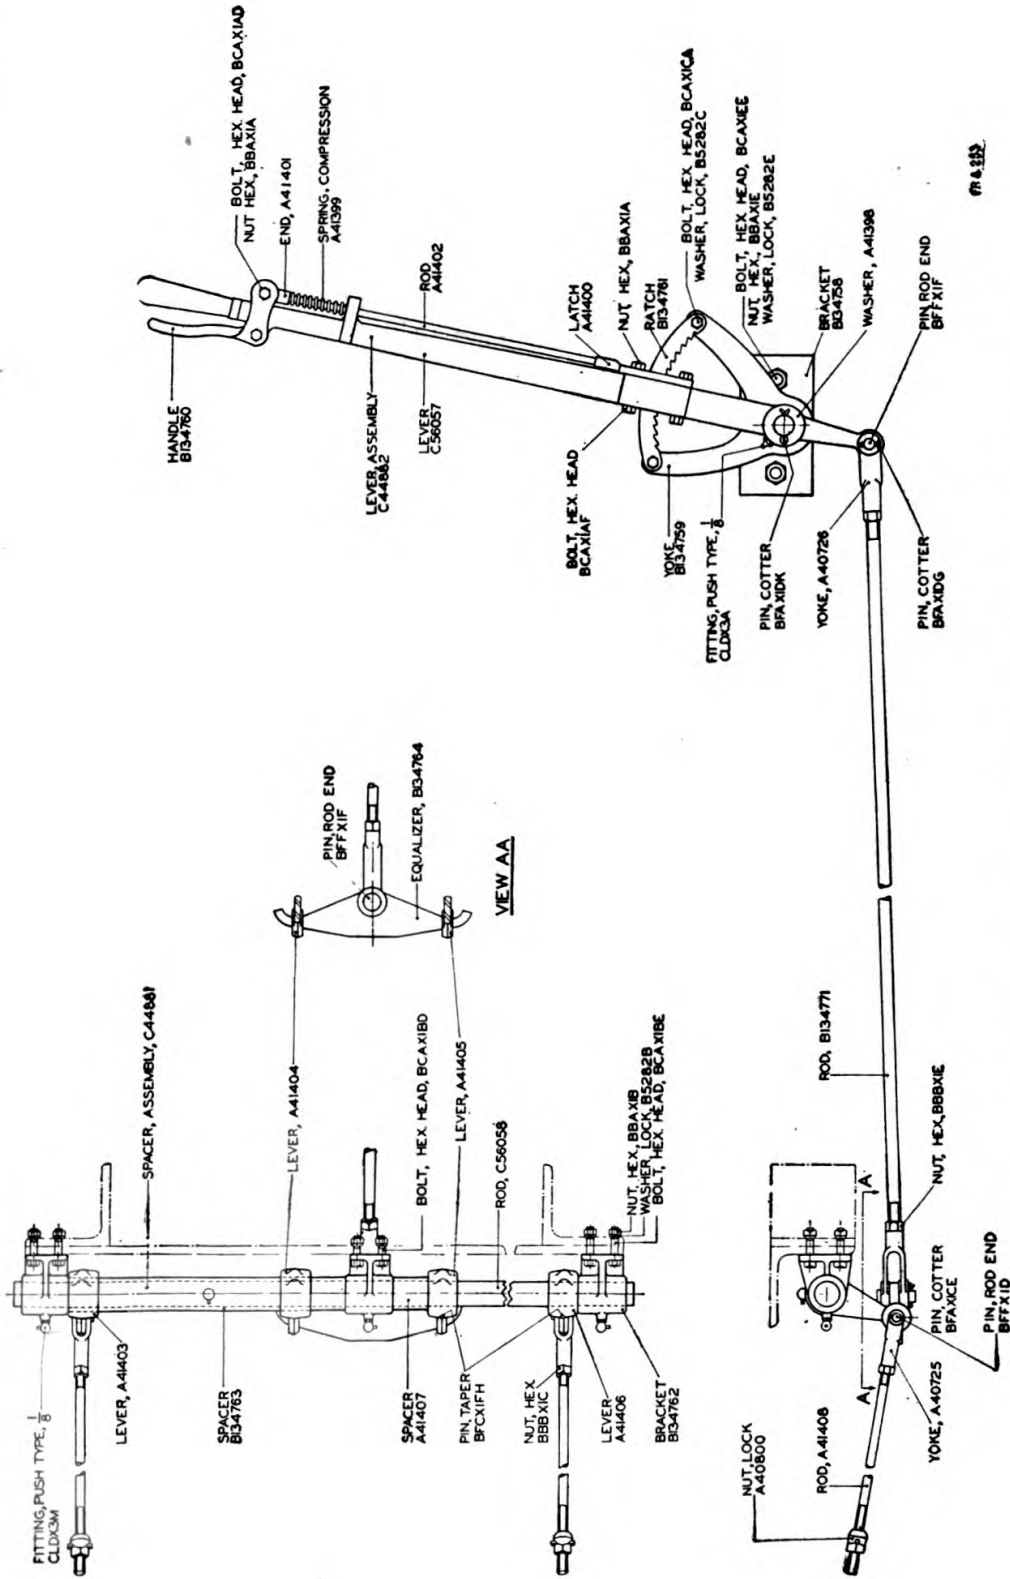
Sound locator trailer, M2A2 and M2A3—brake rod and lever arrangement.
